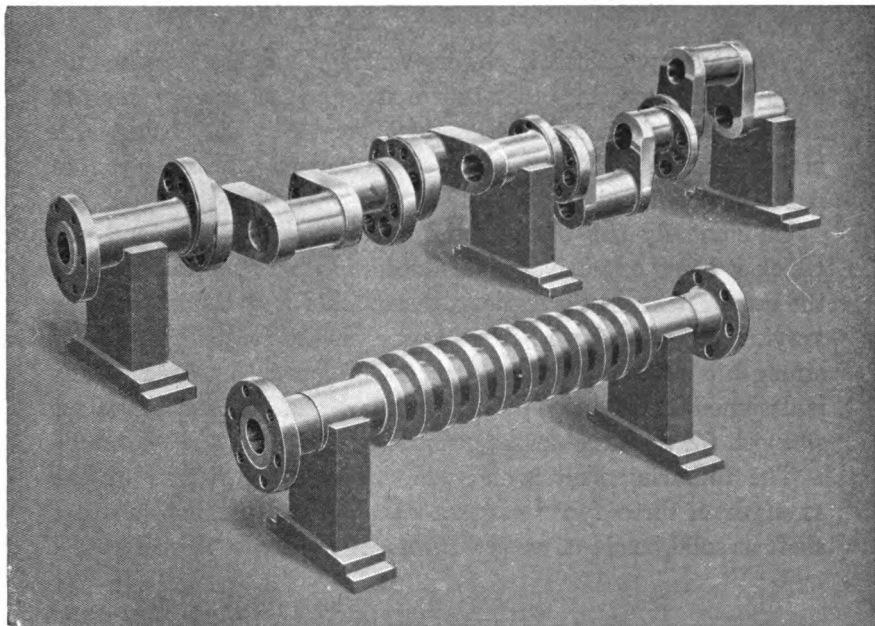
CRANK AND THRUST SHAFTS FOR THE U.S. TORPEDO BOAT "SHUBRICK," MADE OF OIL-TEMPERED NICKEL STEEL; $6\frac{3}{4}$ INCHES OUTSIDE DIAMETER; 4 INCHES AXIAL HOLE, EACH FORGED IN ONE PIECE; CRANK SHAFT TURNED ON 13 CENTRES. WEIGHT OF CRANK SHAFT, 1,650 LBS.; WEIGHT OF THRUST SHAFT, 1,800 LBS.
